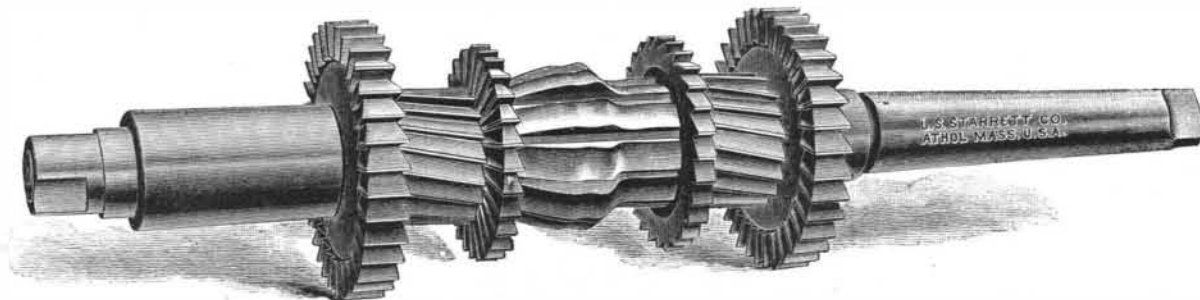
STARRETT'S GANGS OF MILLING CUTTERS.
